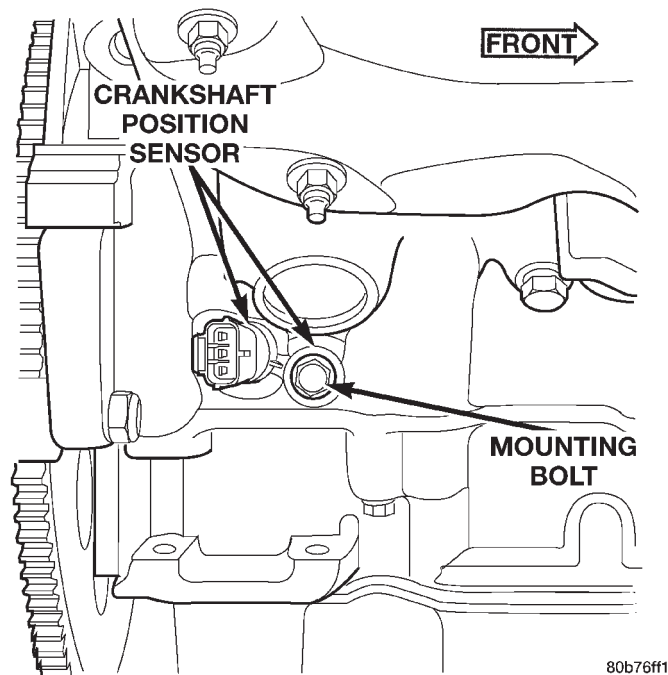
CKP Sensor Removal/Installation—4.7L V-8 Engine
